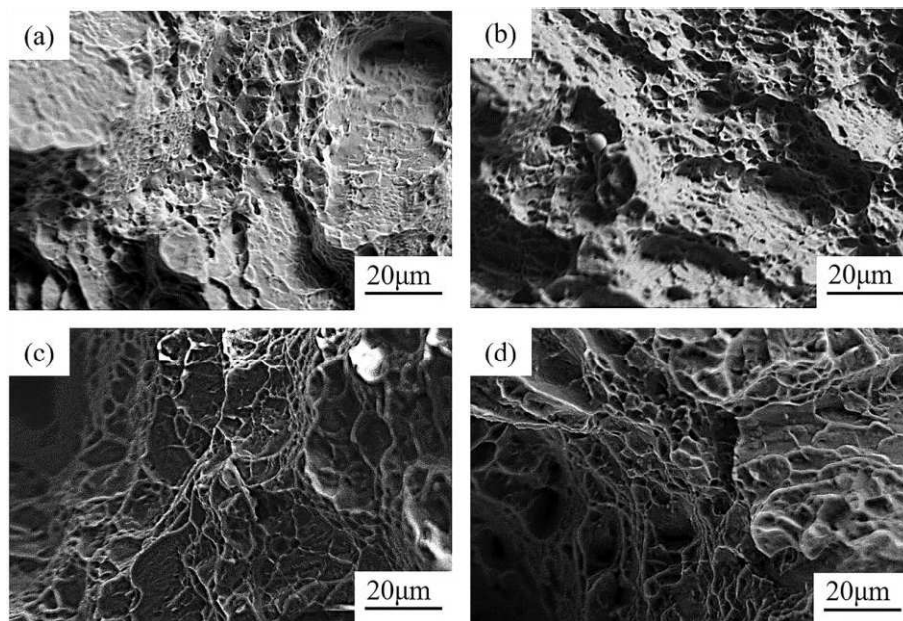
Fracture morphologies of L-PBF TA15 under different conditions: (a) as-built, (b) HT1, (c) HT5, and (d) HT6.
